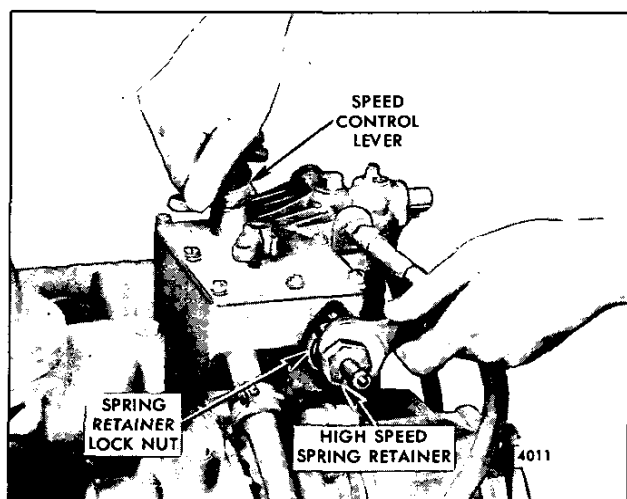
Adjusting Maximum No-Load Engine Speed
